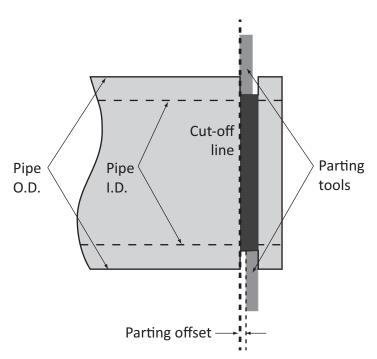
The drawing illustrates the parting operation, with two offset parting tools. The parting offset distance is built into the parting and parting/beveling tool holders.
